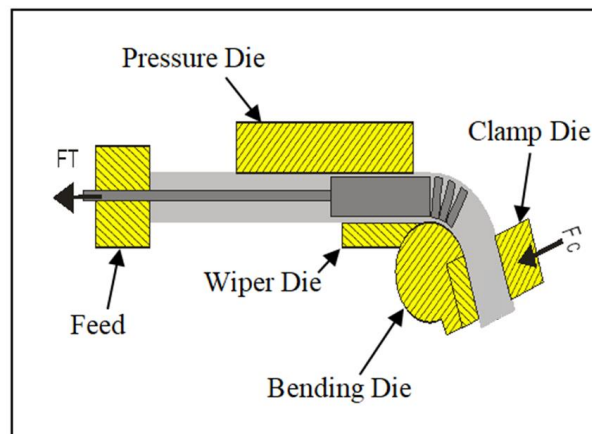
Rotary draw bending with clamp force F_c and Tension force F_t .
